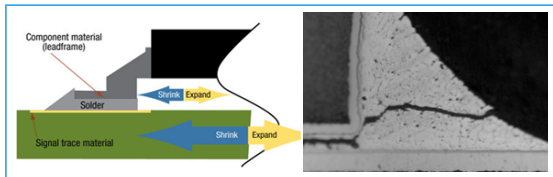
Failure Mechanisms by Solder Fatigue[11]
